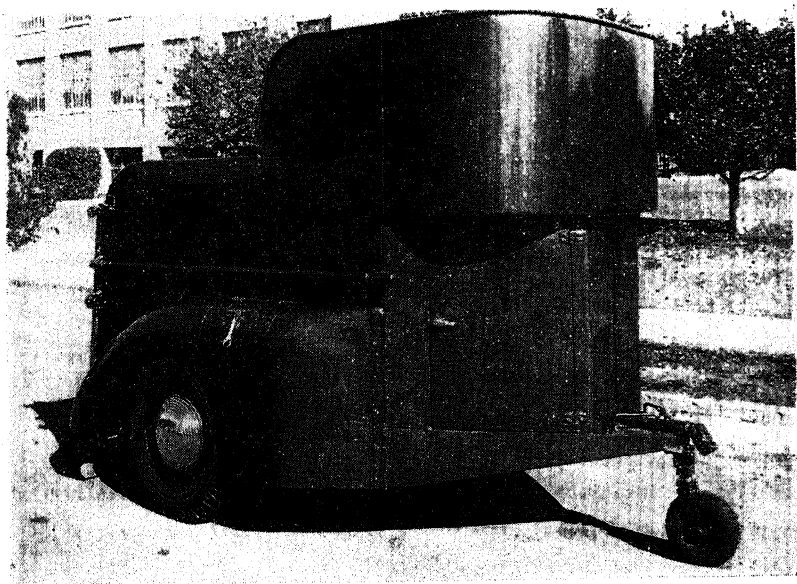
A special trailer of all welded steel construction. Replaces wood construction, saving 20% in cost.
